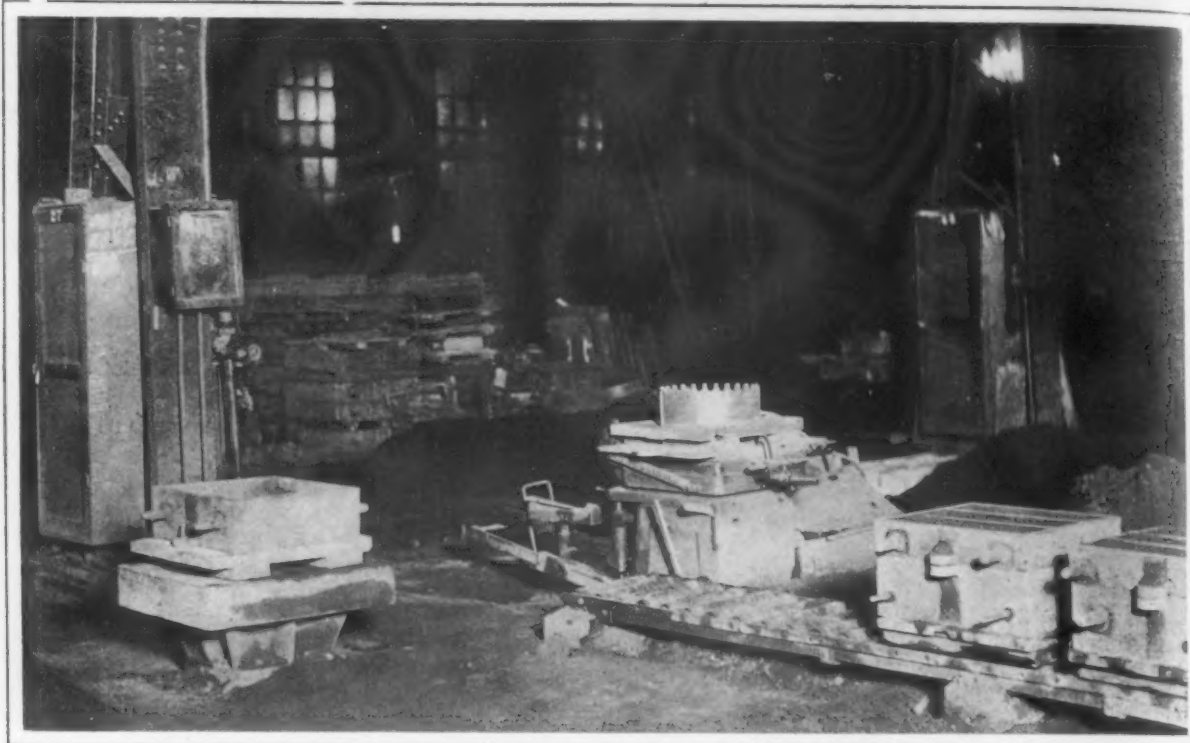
Electric Jolt Roll-Over and Plain Air Jolt Molding Machines with Conveyors Arranged Between the Two Machines
